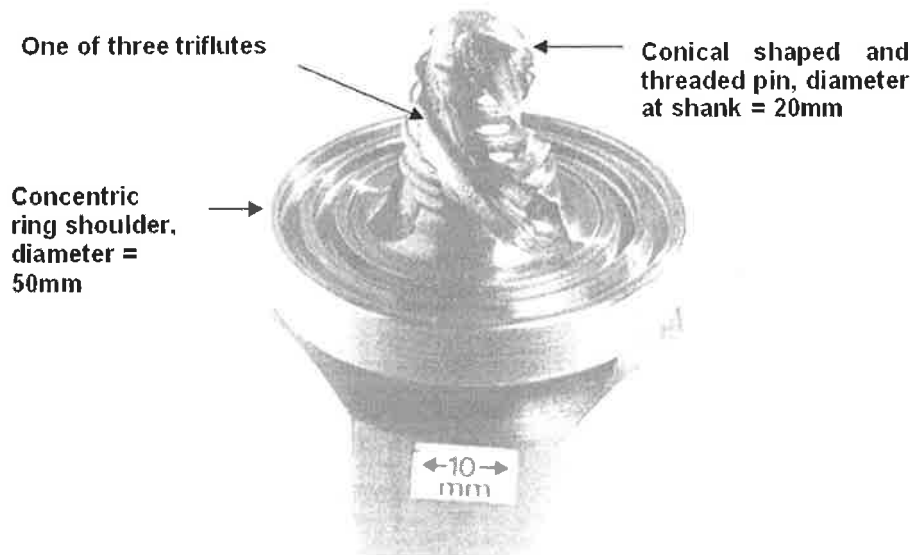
MX Triflute™ tool with conical shaped pin and triflutes [32].
